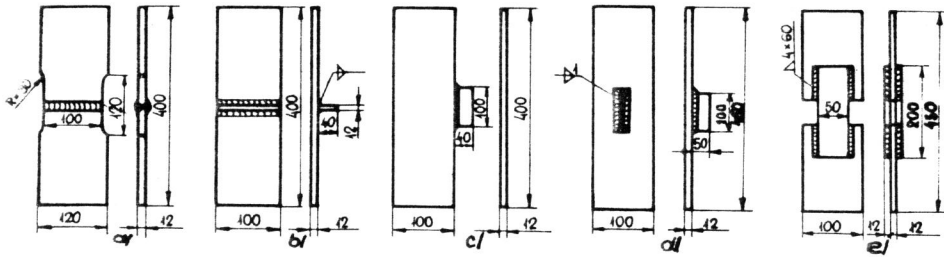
The specimens with butt welds made from both sides between plates (a) fillet welds made on the transverse stiffener (b) - on the flank stiffener (c) - on the longitudinal stiffener (d) and along doublers on plates (e).
